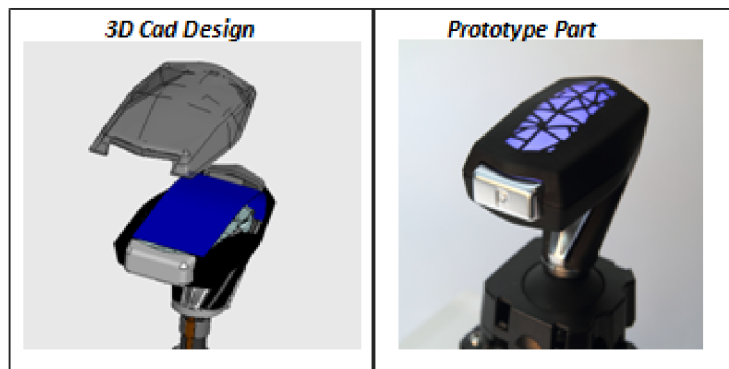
3D Cad design and prototype part of a gear shifter designed with the OLED panel.
